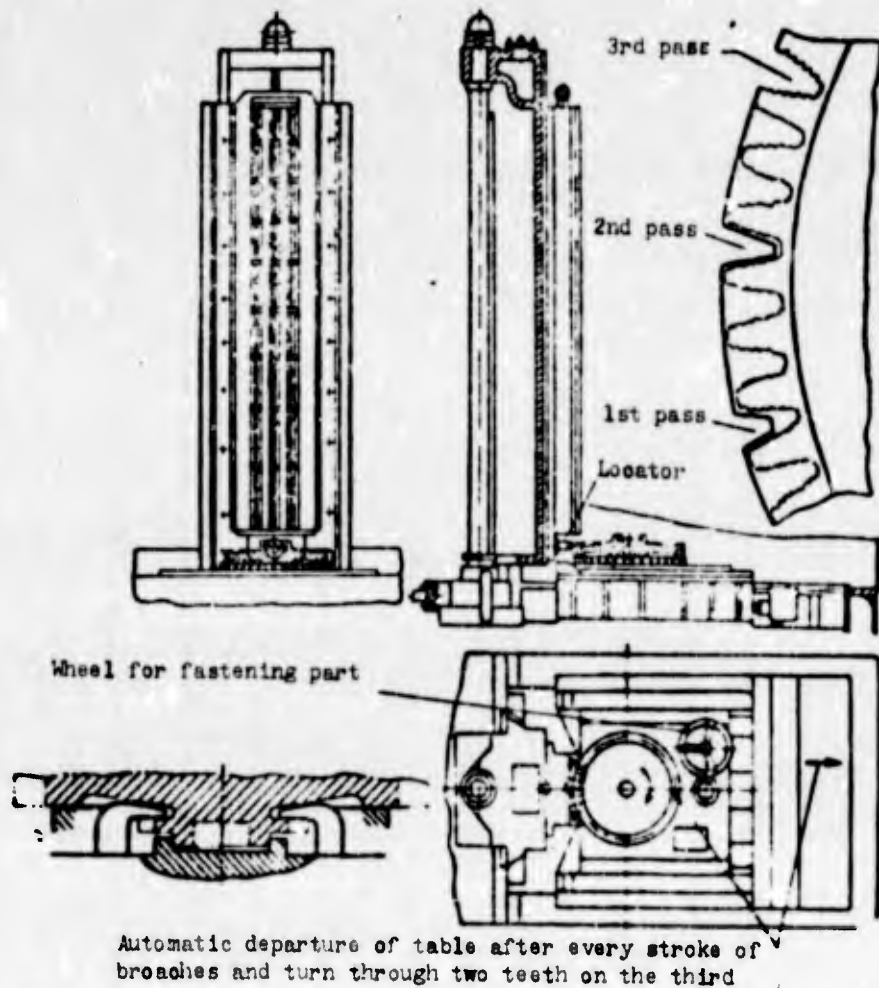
Broaching of wheel grooves on vertical broaching machine MP-15.
